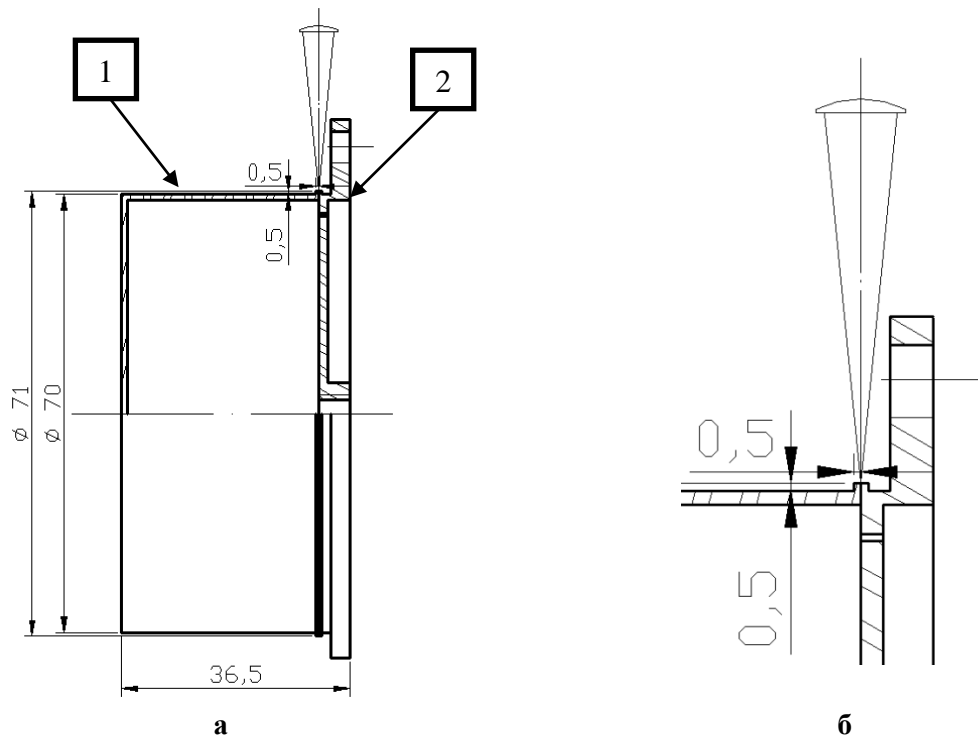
Welding scheme “cover and flange with flanging”: (a) general view, (b) welding location, where 1 – cover, 2 – flange
